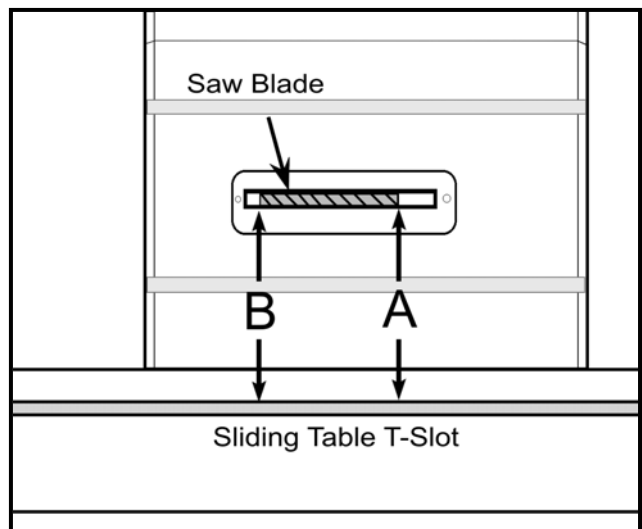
Checking the sliding table T-slot parallelism with the saw blade
